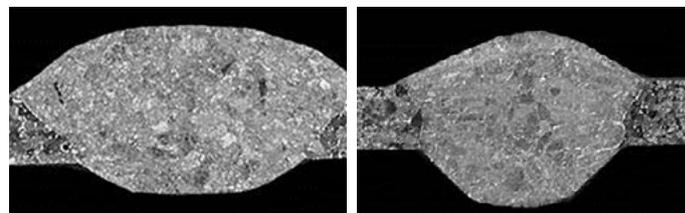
Macrostructure of the joints of the 1 mm thick X6CrTi17 steel made using VP welding variant (a) and the standard arc (b), mag. 6.0, etching with Adler's reagent
